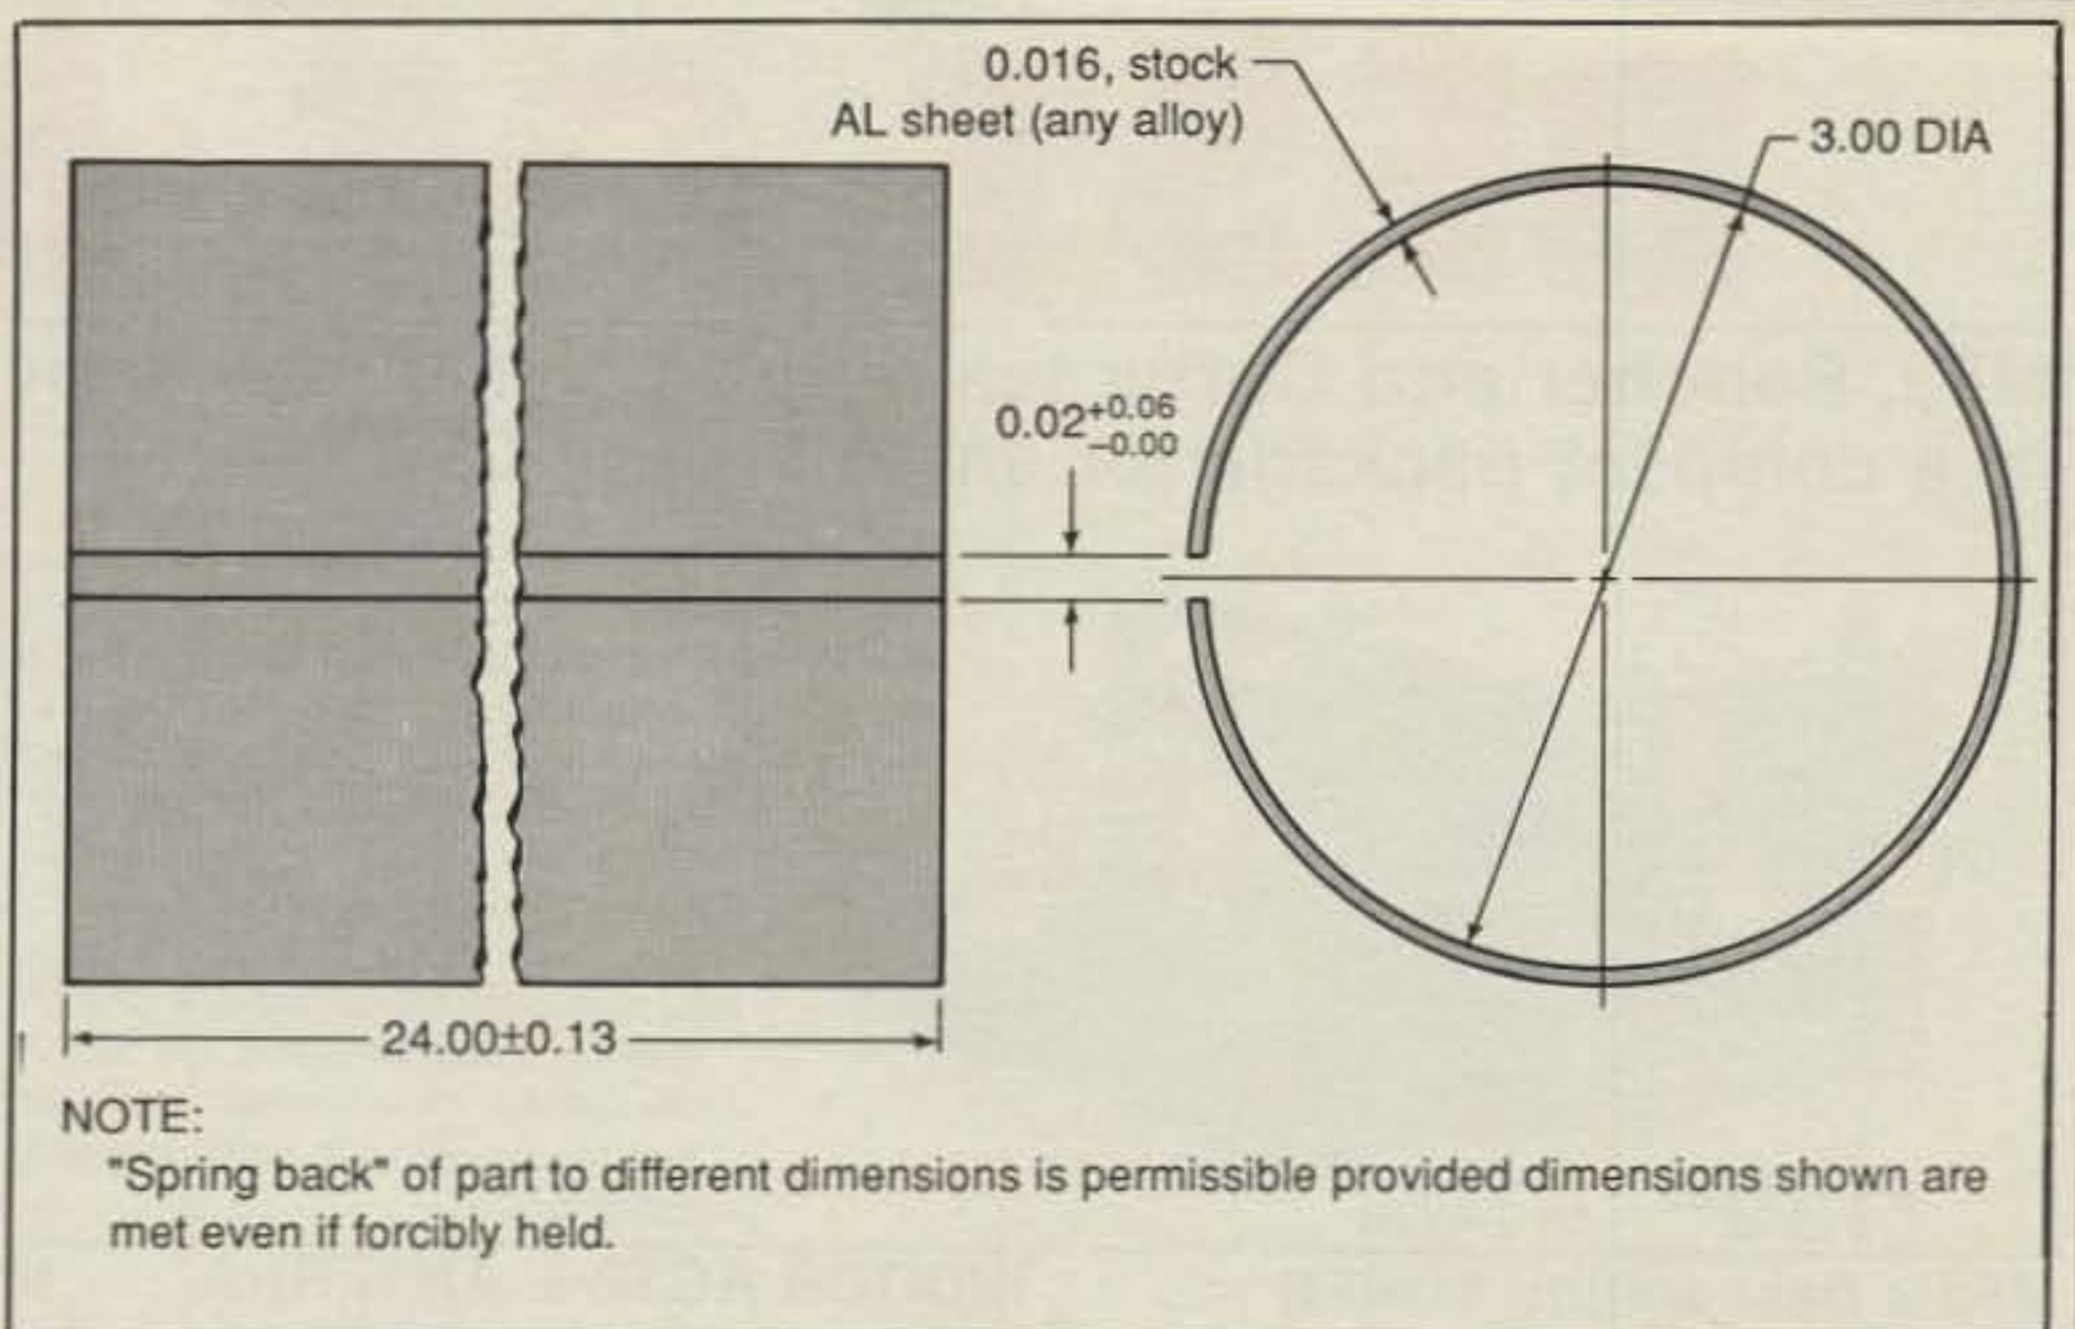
Drawing: Sleeve for 3" tubing to 3.5" pipe in boom.
